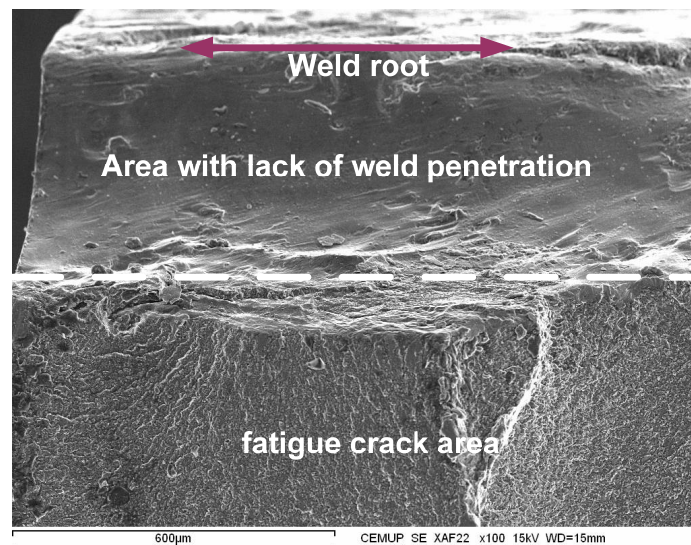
Fatigue crack initiation site, AA6082-T6 FS welded specimen.
